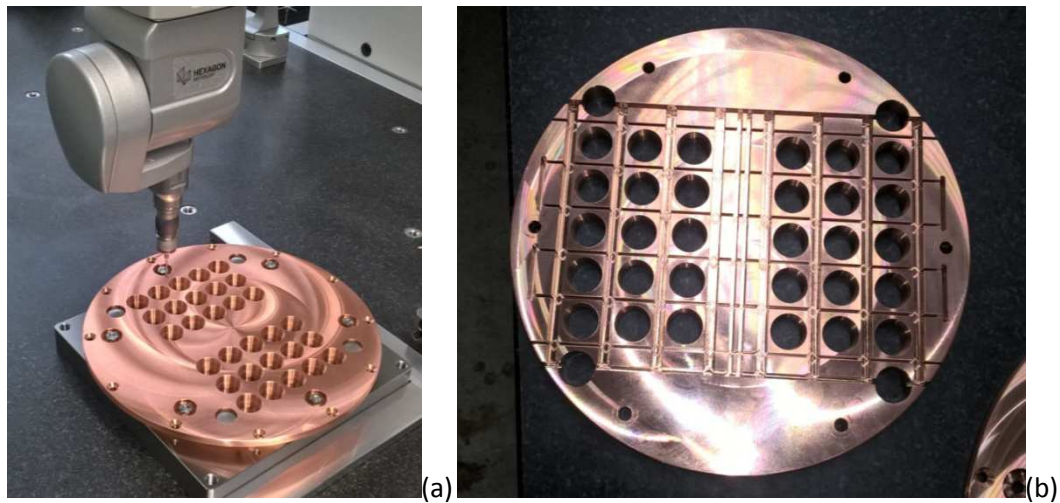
(a) EG downstream part during dimensional control, (b) EG upstream part.
